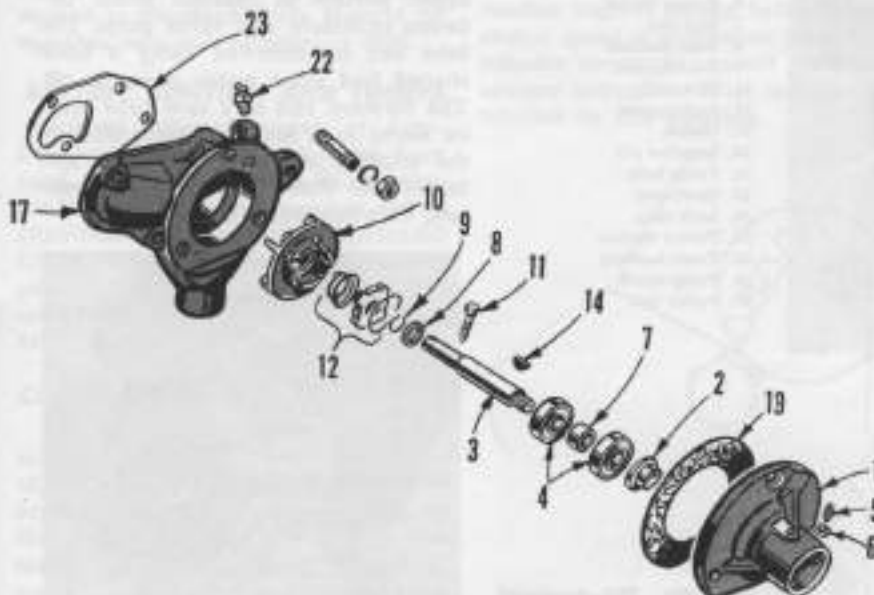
Late type ball bearing pump used on Continental engines.
